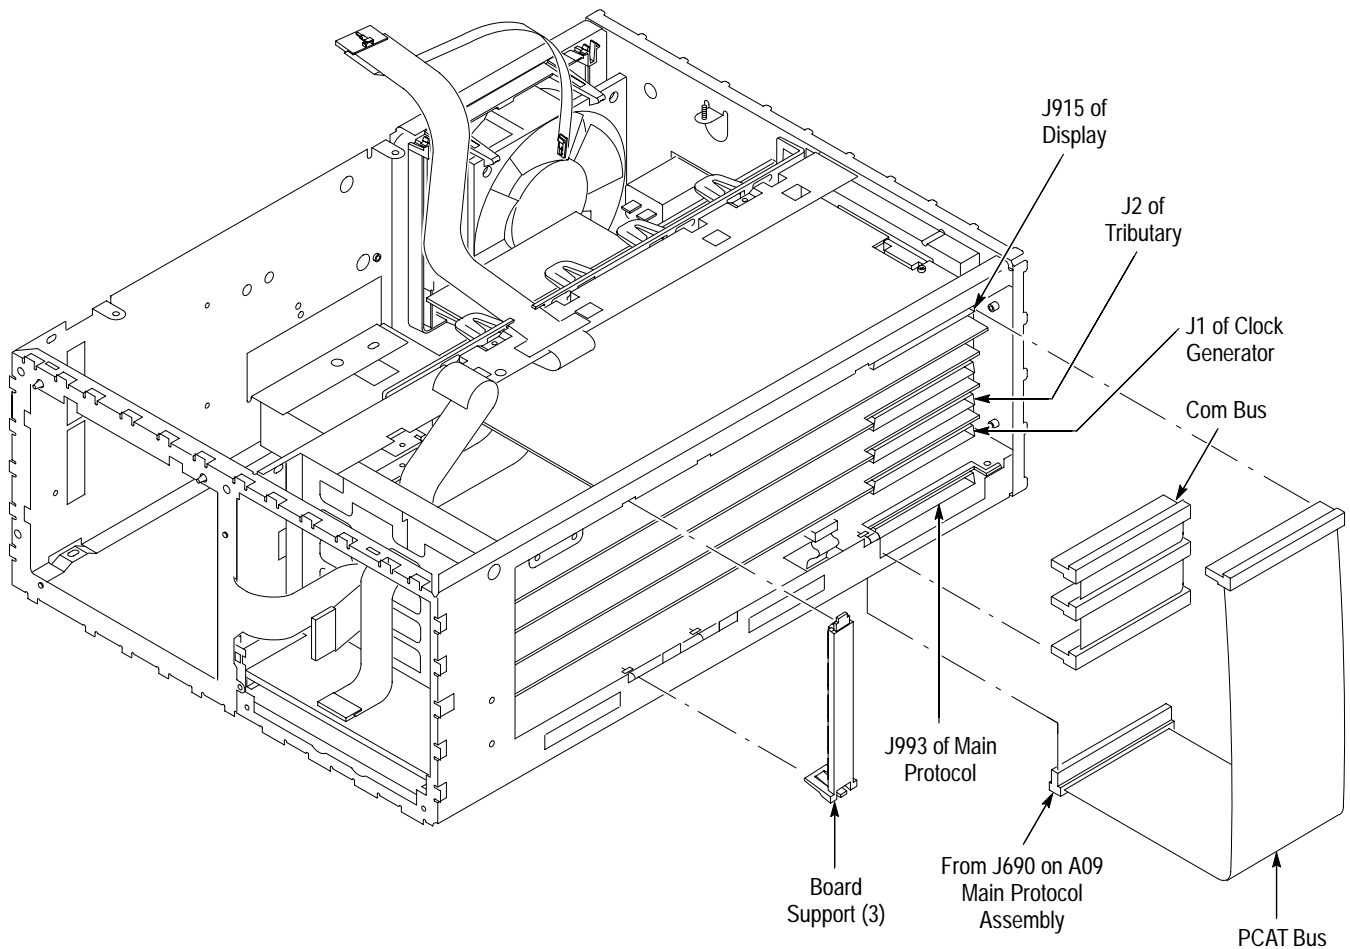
Com Bus, Board Supports, and PCAT Bus Removal
